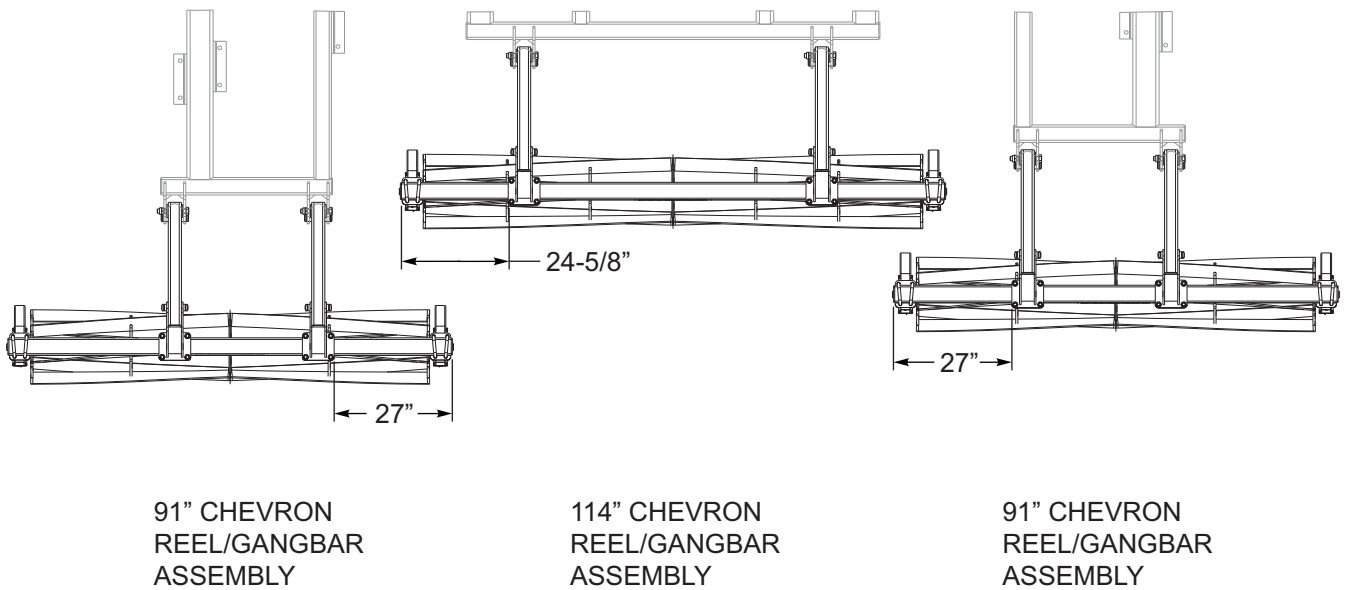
Chevron Flat Bar Reel Placement - 23
